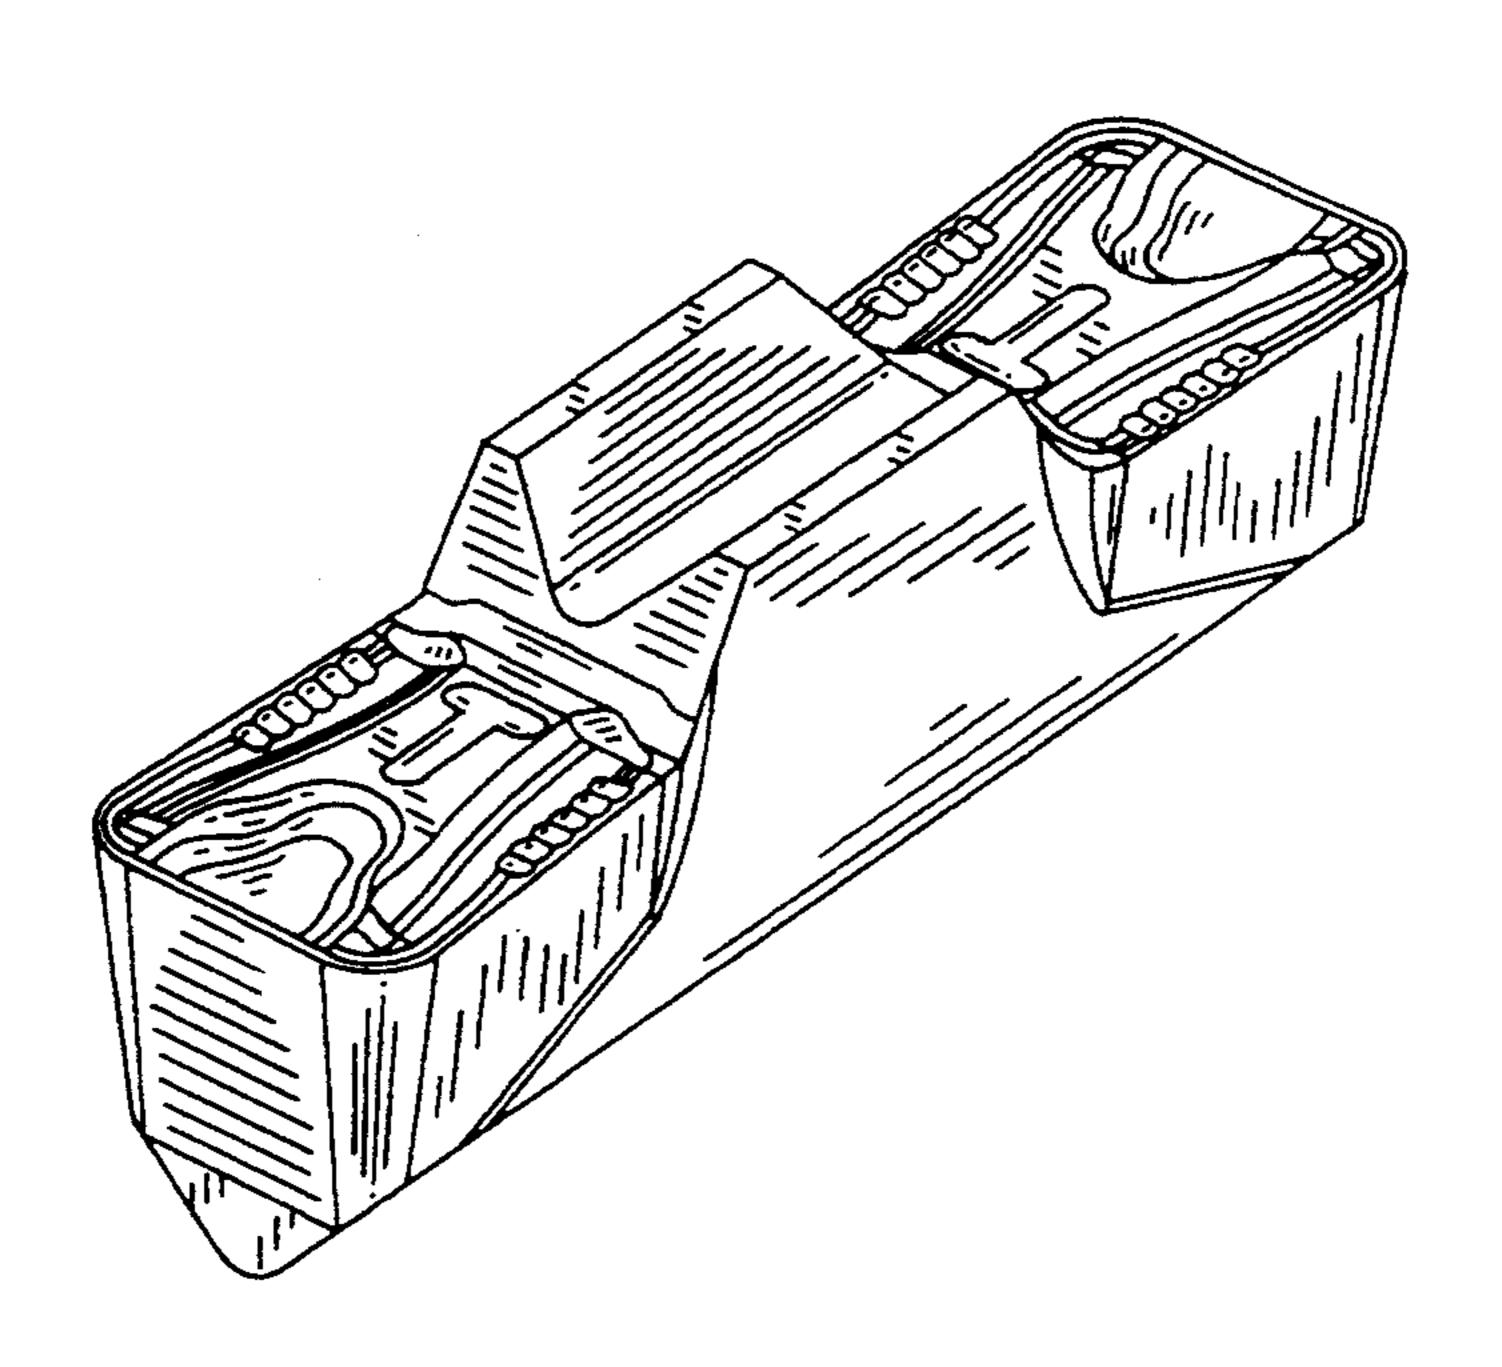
is a top perspective view of a reversible cutting insert according to the present invention;
